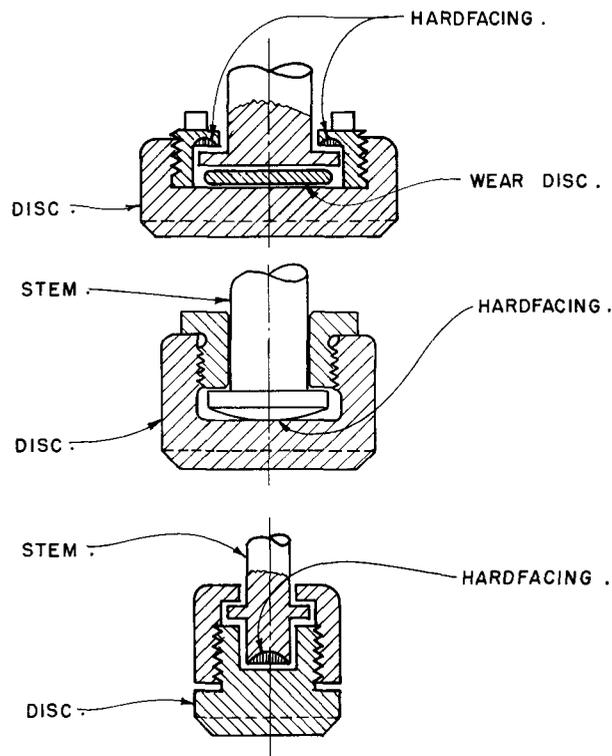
Typical Stem-to-Disc Swivel Connections in Rising-Stem Rotating Shaft Designs.
